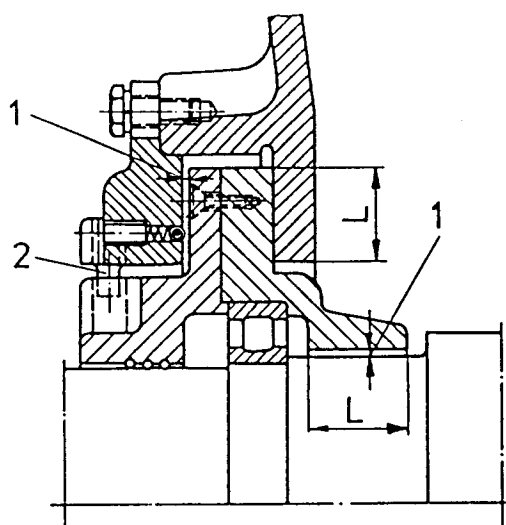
Example of cylindrical joint for shaft of rotating electrical machine
